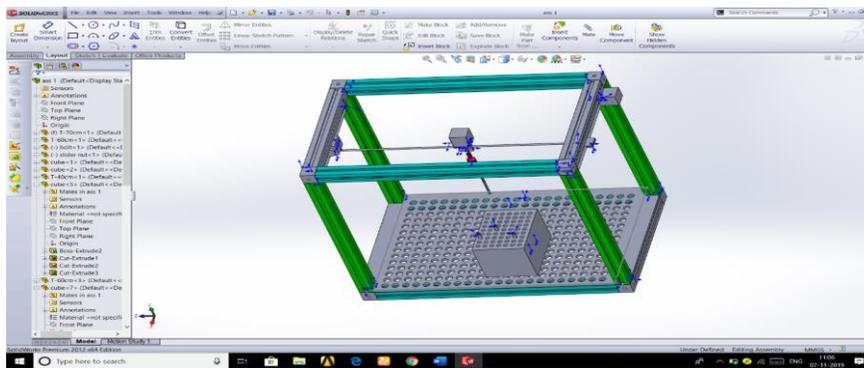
This is the top view of the frame. This include pegboard and test tube holder in it
